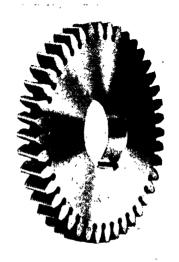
"RED RING" GASHED HELICAL SHAVING CUTTER
